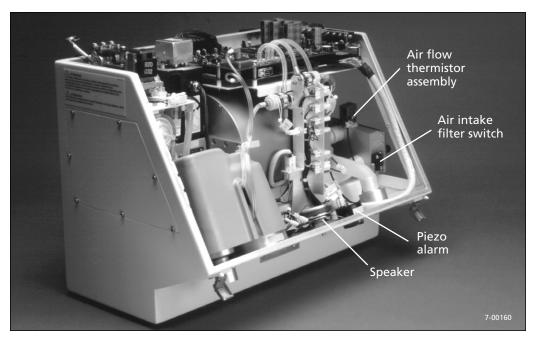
Speaker, piezo alarm, air flow thermistor assembly, and air intake filter switch installed
